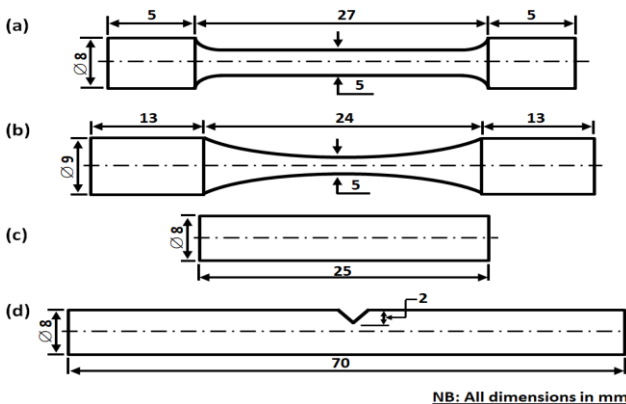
Schematic diagrams of the machined (a) tensile; (b) fatigue; (c) compression and (d) impact tests specimens
